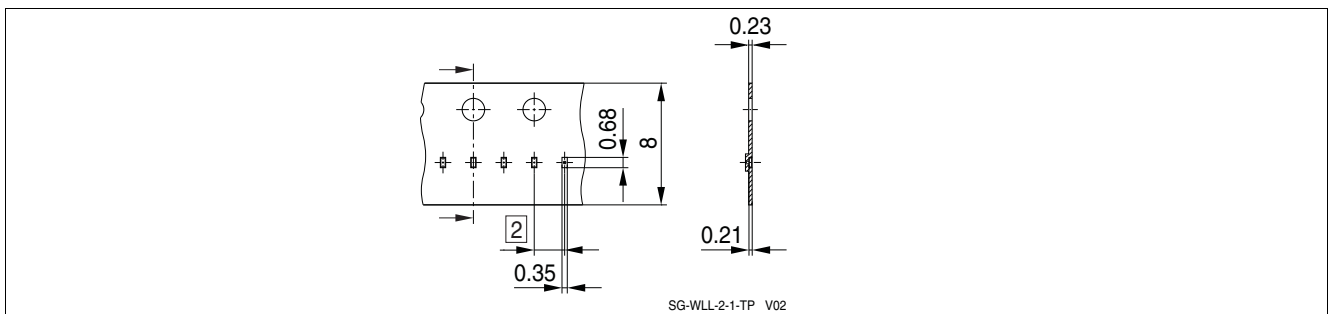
WLL-2-1 Packing (dimension in mm)
